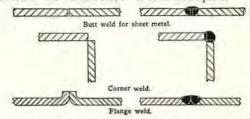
Standard joint designs for sheet-metal welding. The black area indicates the weld.
